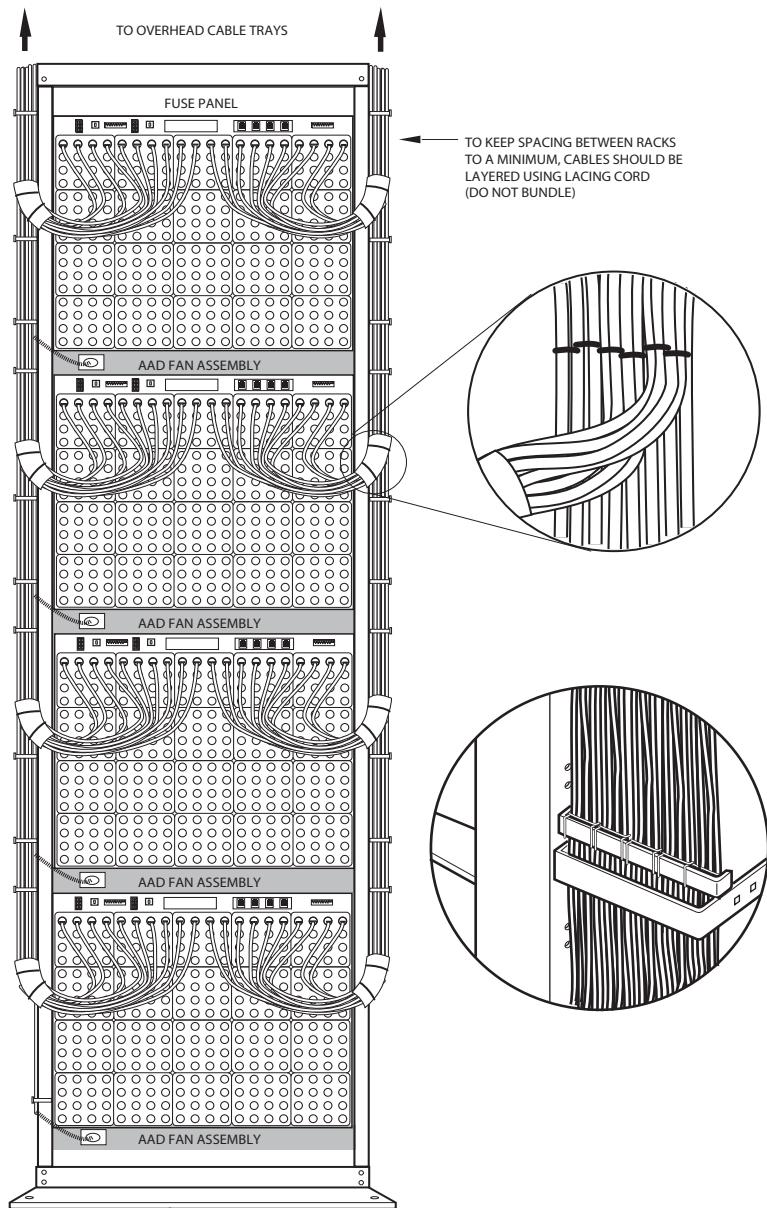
Cable Routing to the Side and Up into Overhead Cable Trays
